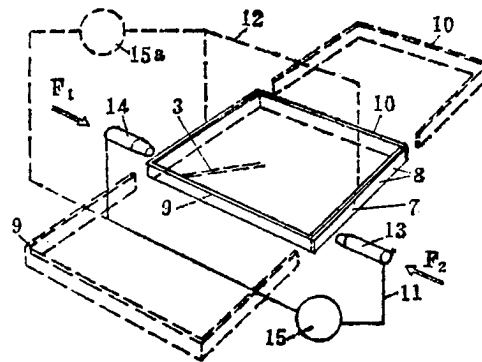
Spot-welding of fuel core wrapped in U-shaped Zr strips
